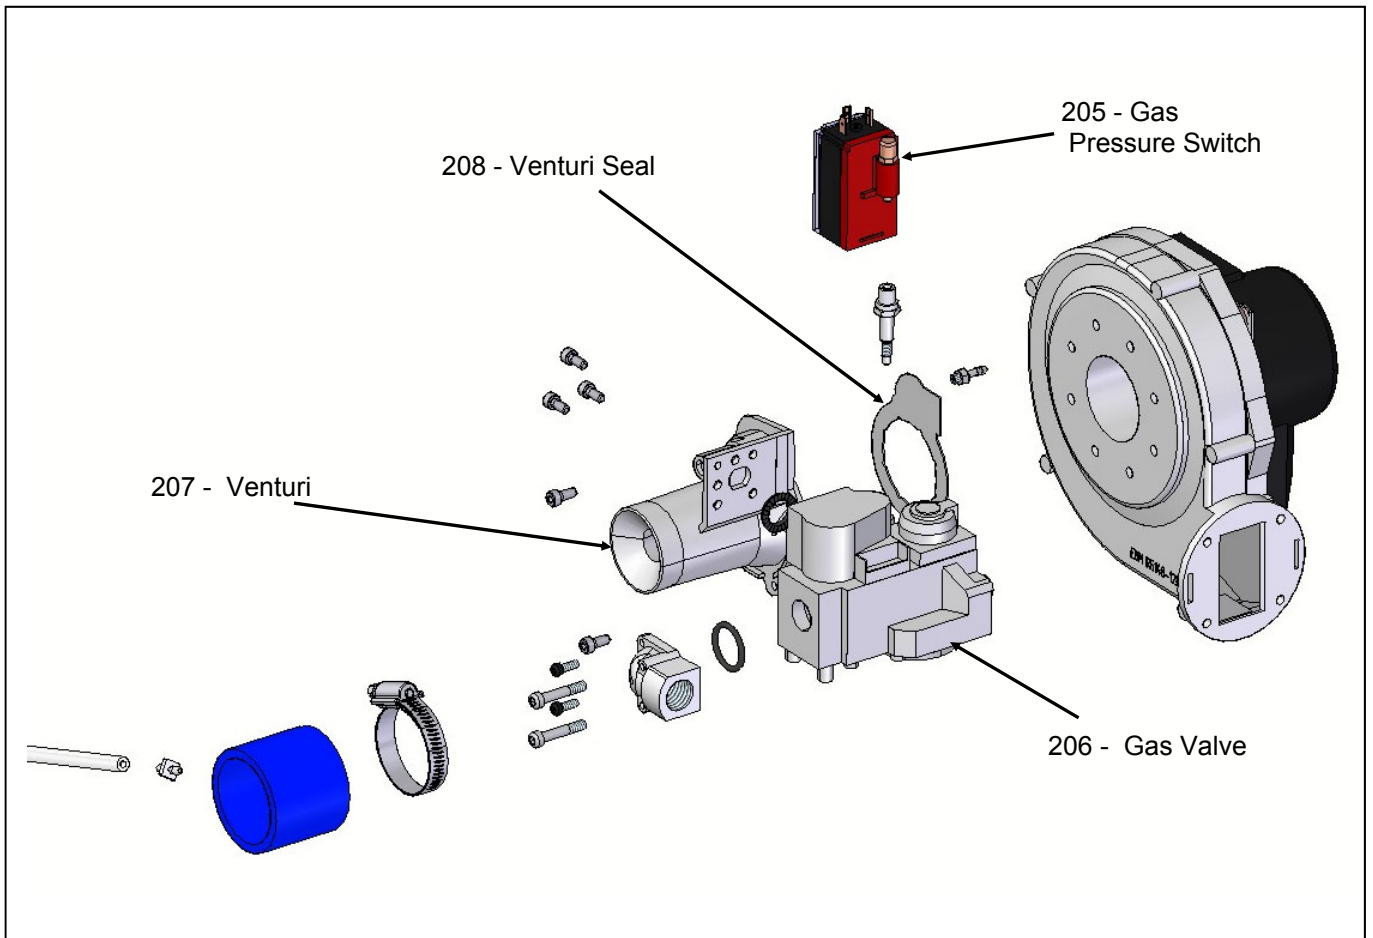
Gas Valve Assembly Models PV70c
